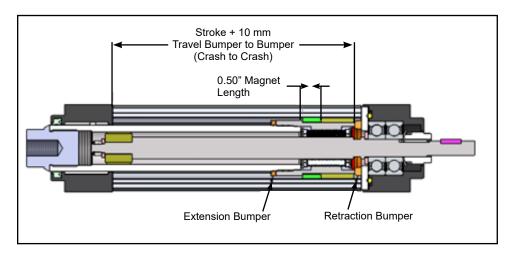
Actuator Shown in fully retracted "crash" position, with contact on the Retraction Bumper
